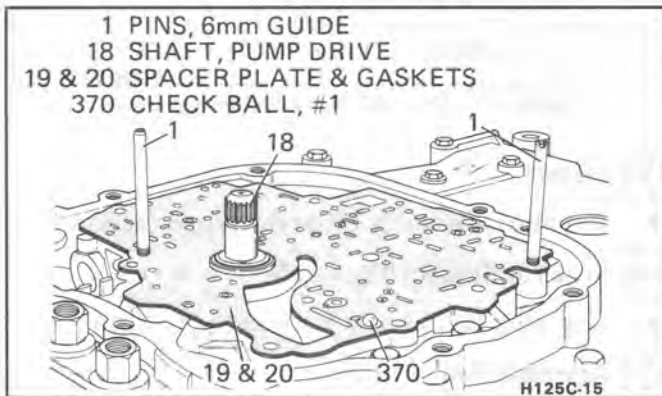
Control Valve Pump Assembly, Oil Pump Shaft
